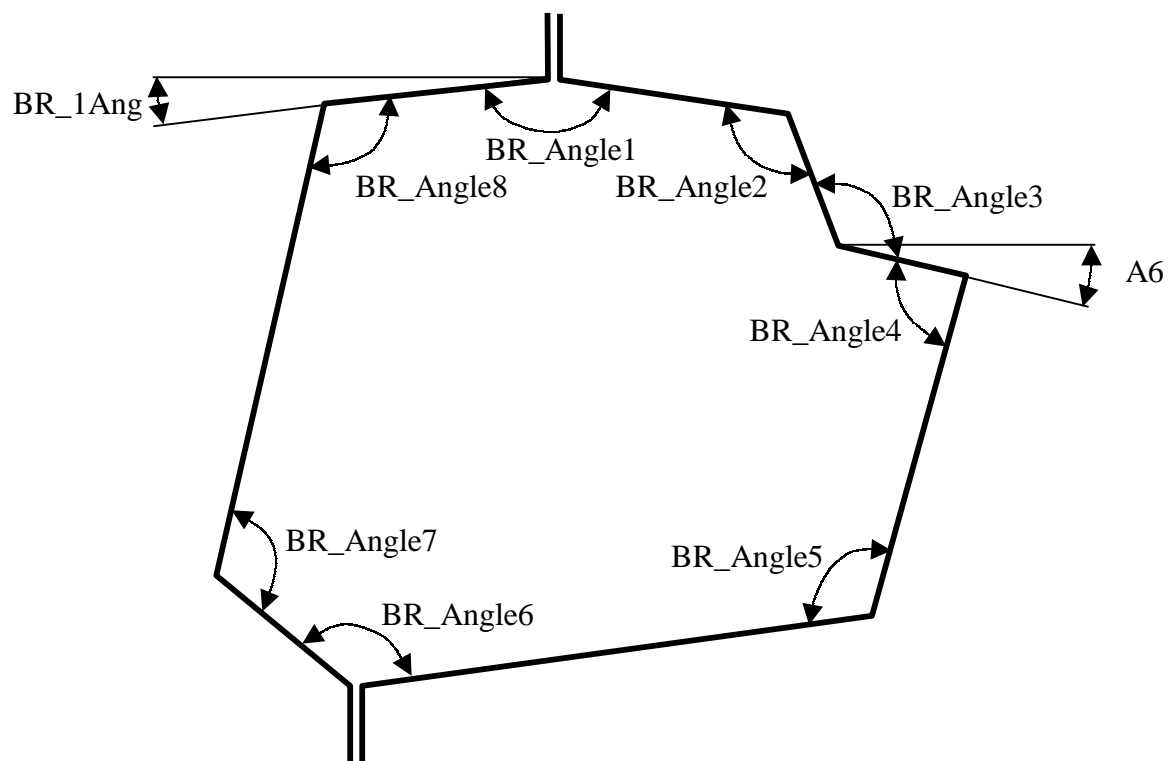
Manufacturing Constraints on Angles of Rocker Cross Section
